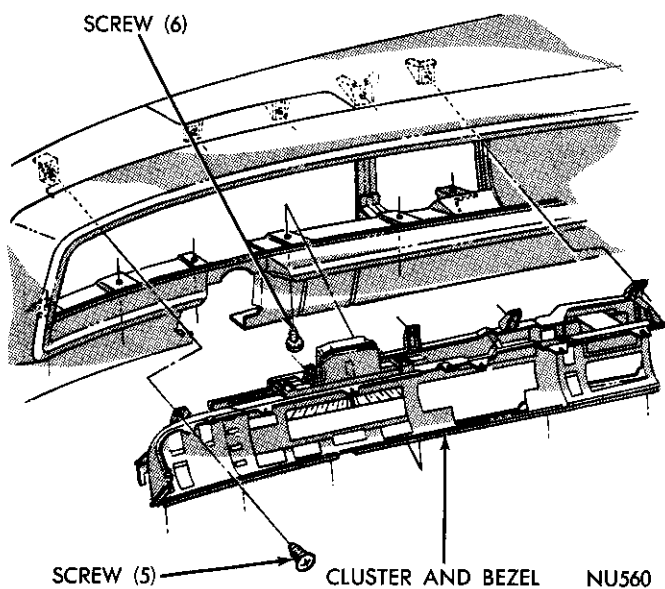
Cluster and Bezel—Removing and Installing—Imperial
